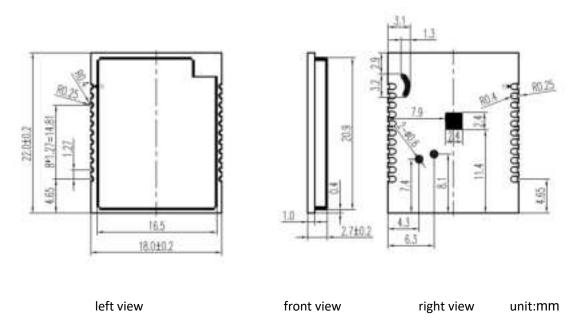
Dimensional drawing of L-LRNWB25-84DN4
